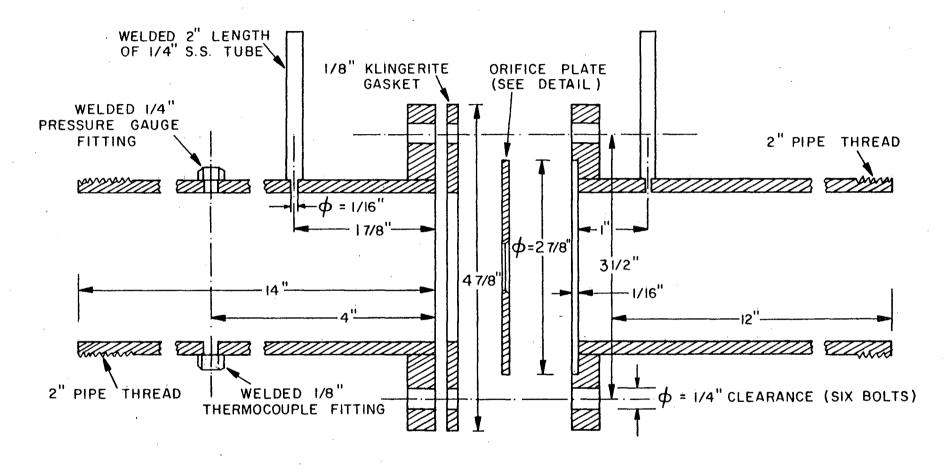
ORIFICE PLATE CONSTRUCTION DETAIL
